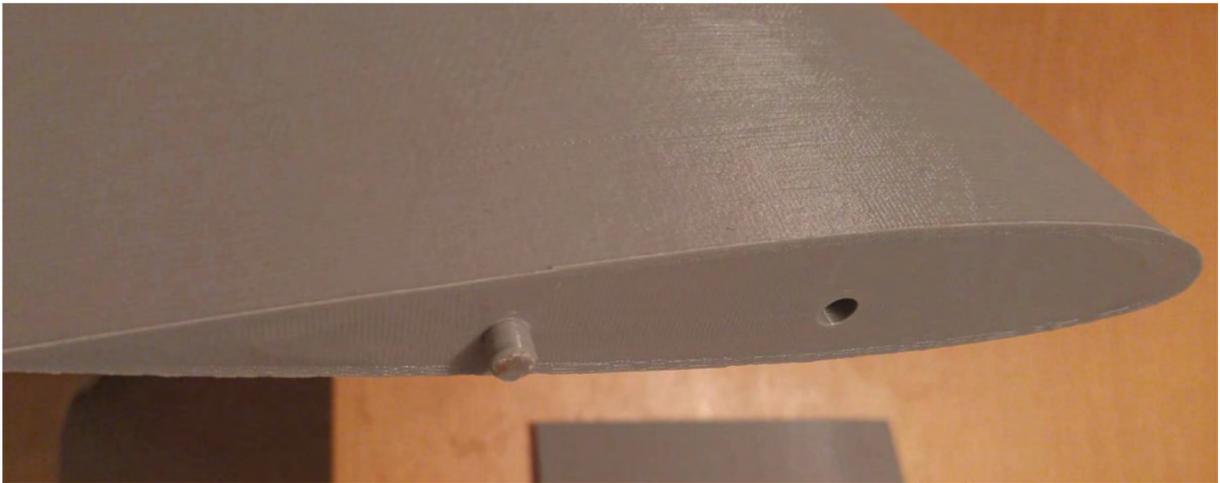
Hole & Dowel System used for Joining Wing Sections
